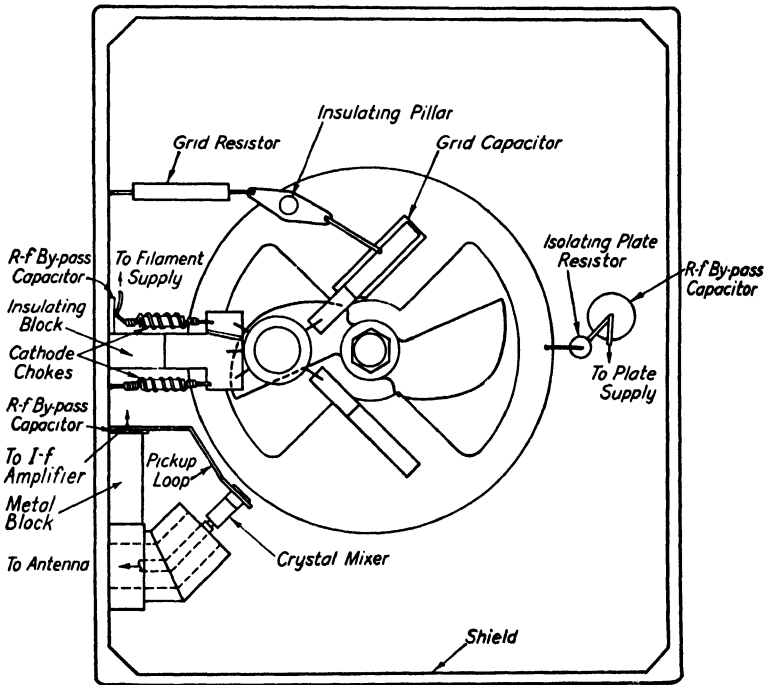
100- to 500-Mc oscillator assembly.
